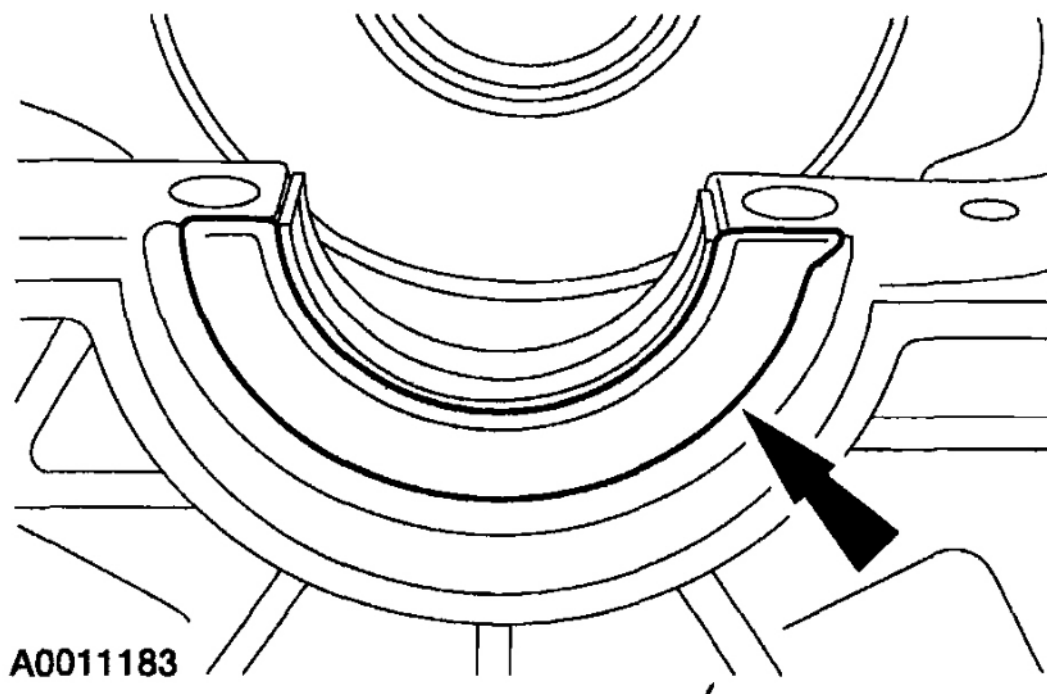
Removing/Installing Crankshaft Thrust Bearing At Cylinder Block
